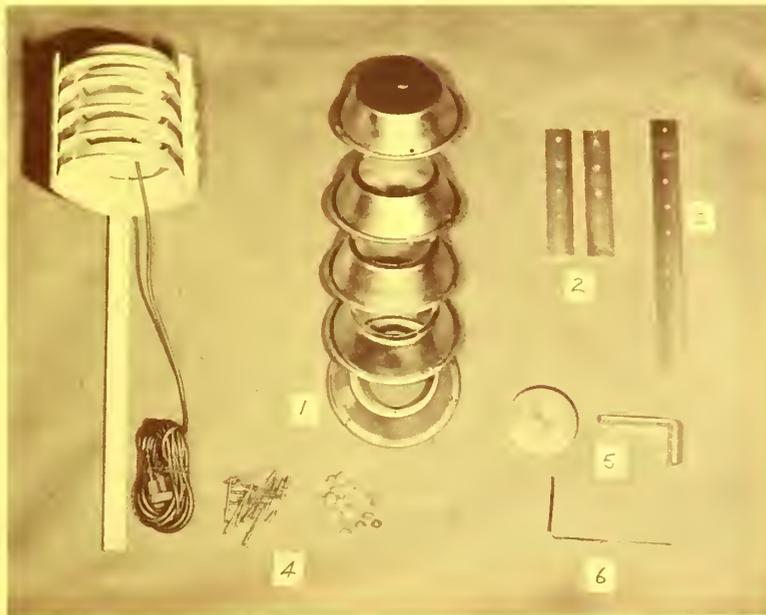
Radiation shield parts ready for assembly, and an assembled model with a thermistor attached. 1—piepans, 2—braces, 3—main support, 4—"pop rivets" and washers, 5—bottom radiation shield and mounting bracket (optional), 6—thermistor or thermocouple mounting bracket.
